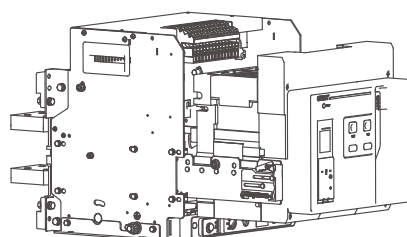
Putting the Circuit Breaker Out of the Drawer Seat
